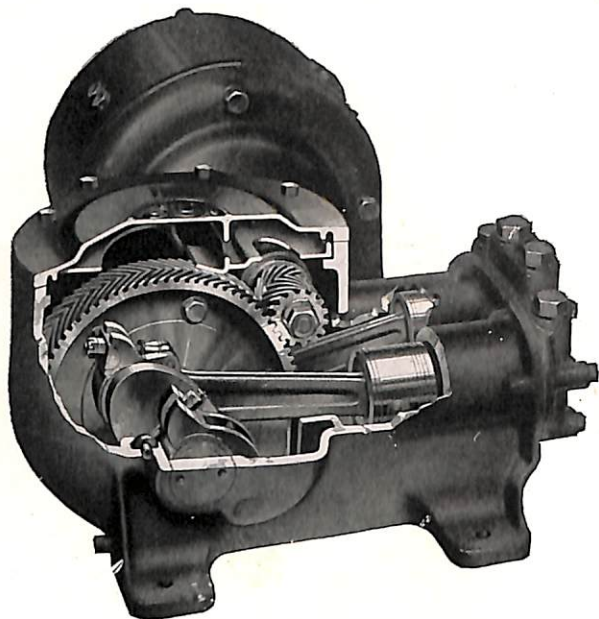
CP-27 Air Compressor, Section View Showing Compressor End
